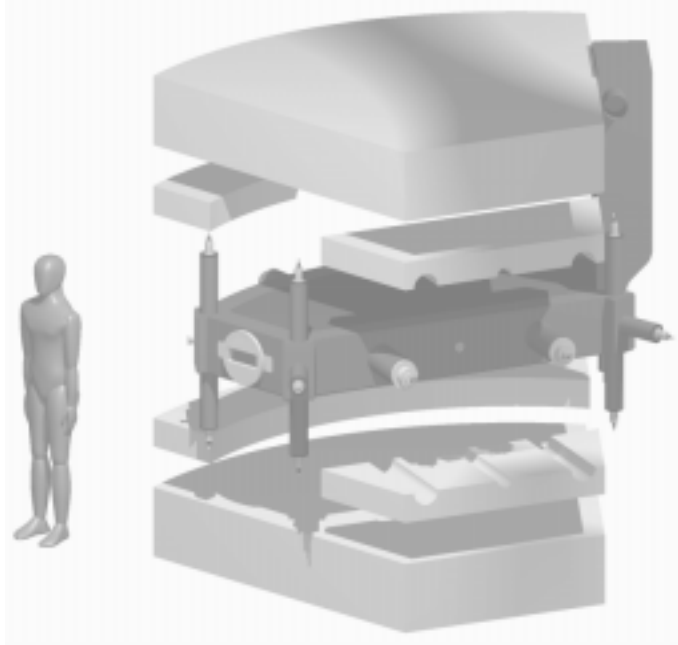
Exploded view of A1900 beamline dipole showing cryostat assembly and steel yoke slabs.
